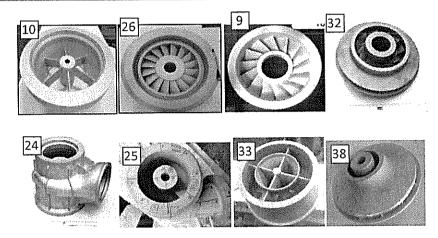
Photograph showing some of the complex turbo pump castings (Number shown in box corresponds to Table 1)
